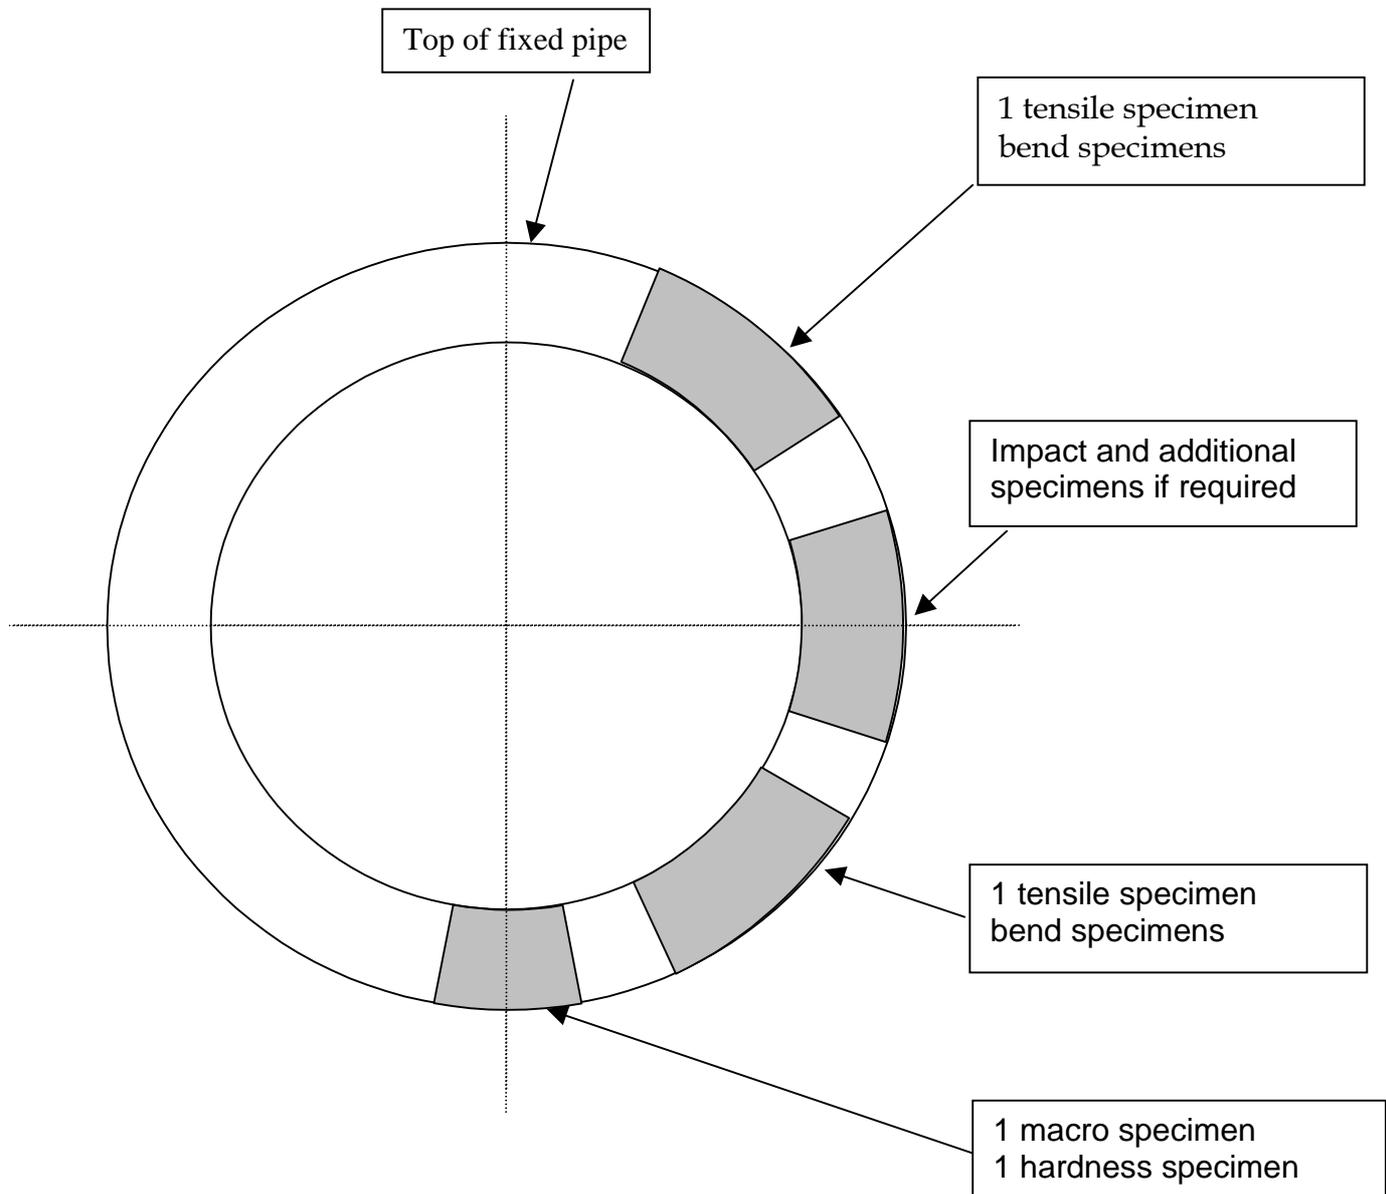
Location of test specimen for butt weld in pipe
